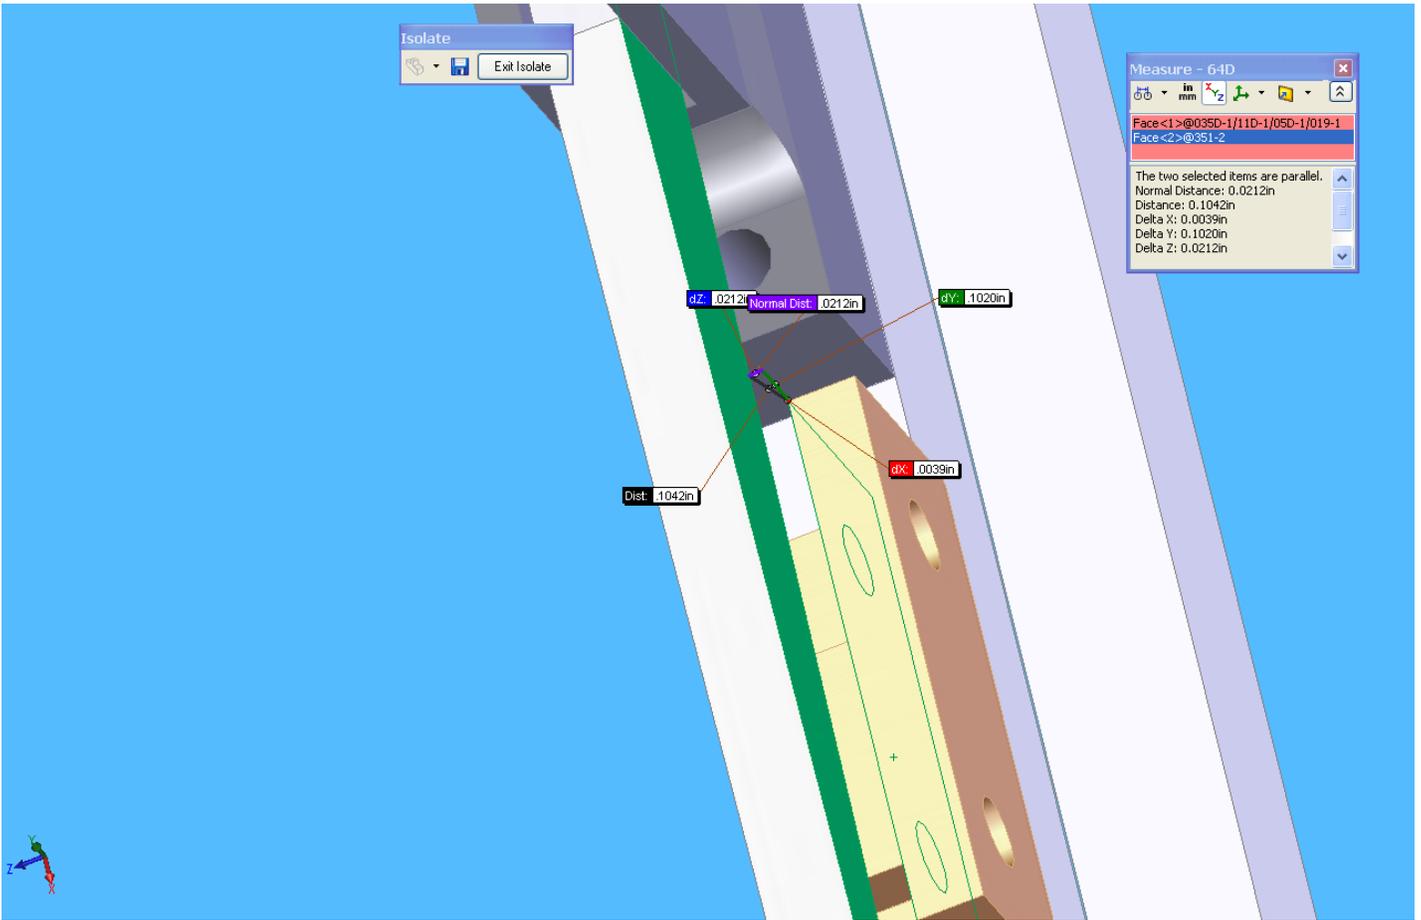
0212 inches of clearance between the boiler bracket and the cantilever beam.
